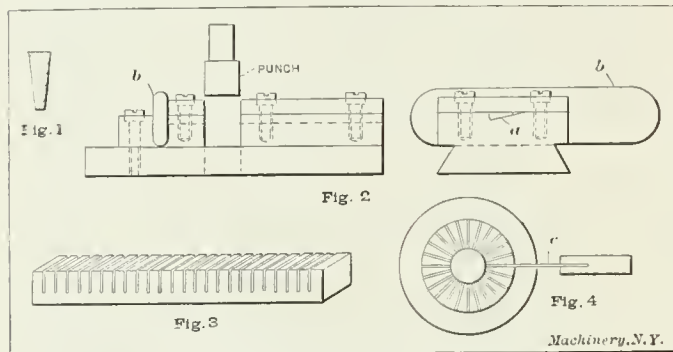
Section of Copper Rod Stock. Fig. 2. Shearing Die. Fig. 3. Stock Rack for Copper and Mica Pieces. Fig. 4. Assembling Ring
